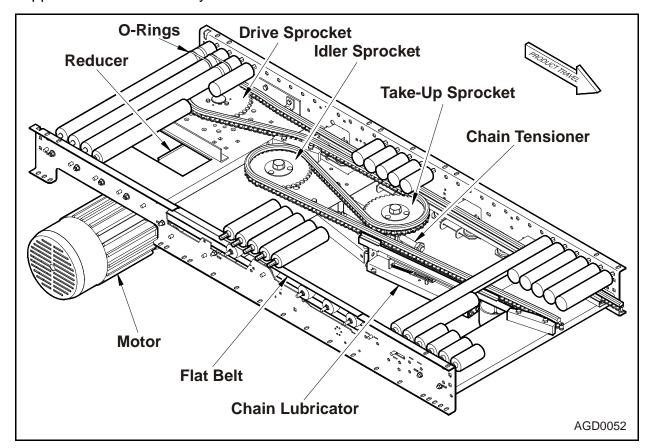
2 Infeed Drive Section (LH Assembly Shown)
